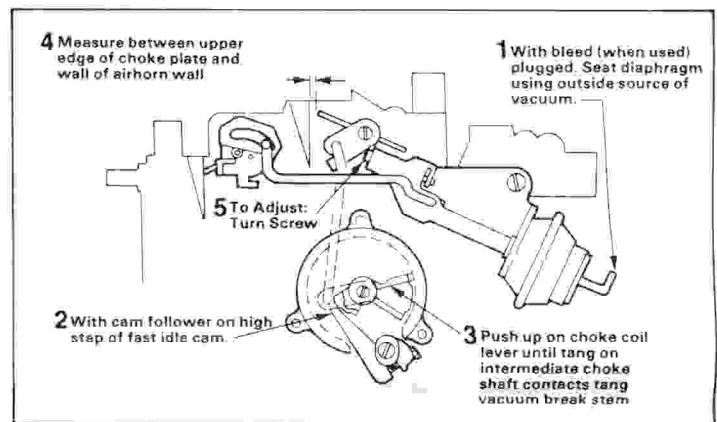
VACUUM BREAK ADJUSTMENT (Front)
